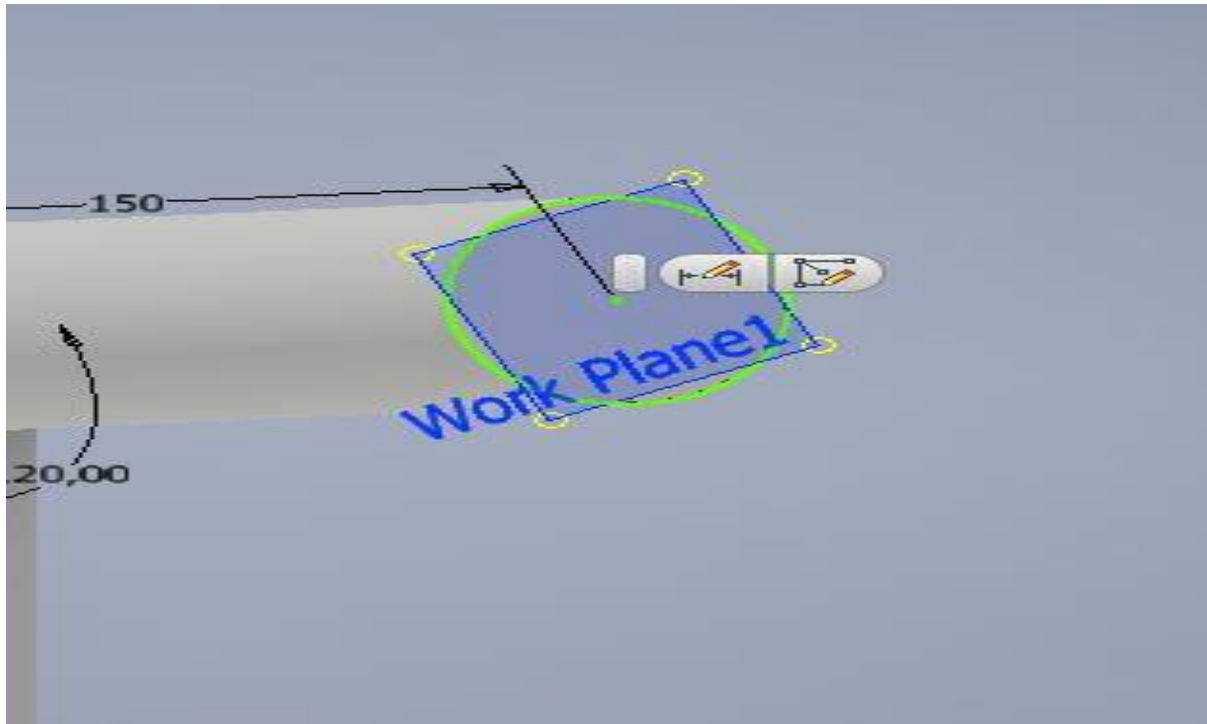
Base part of the Chamber 1-outlet pipe is lifted to draw the design transition piece.
